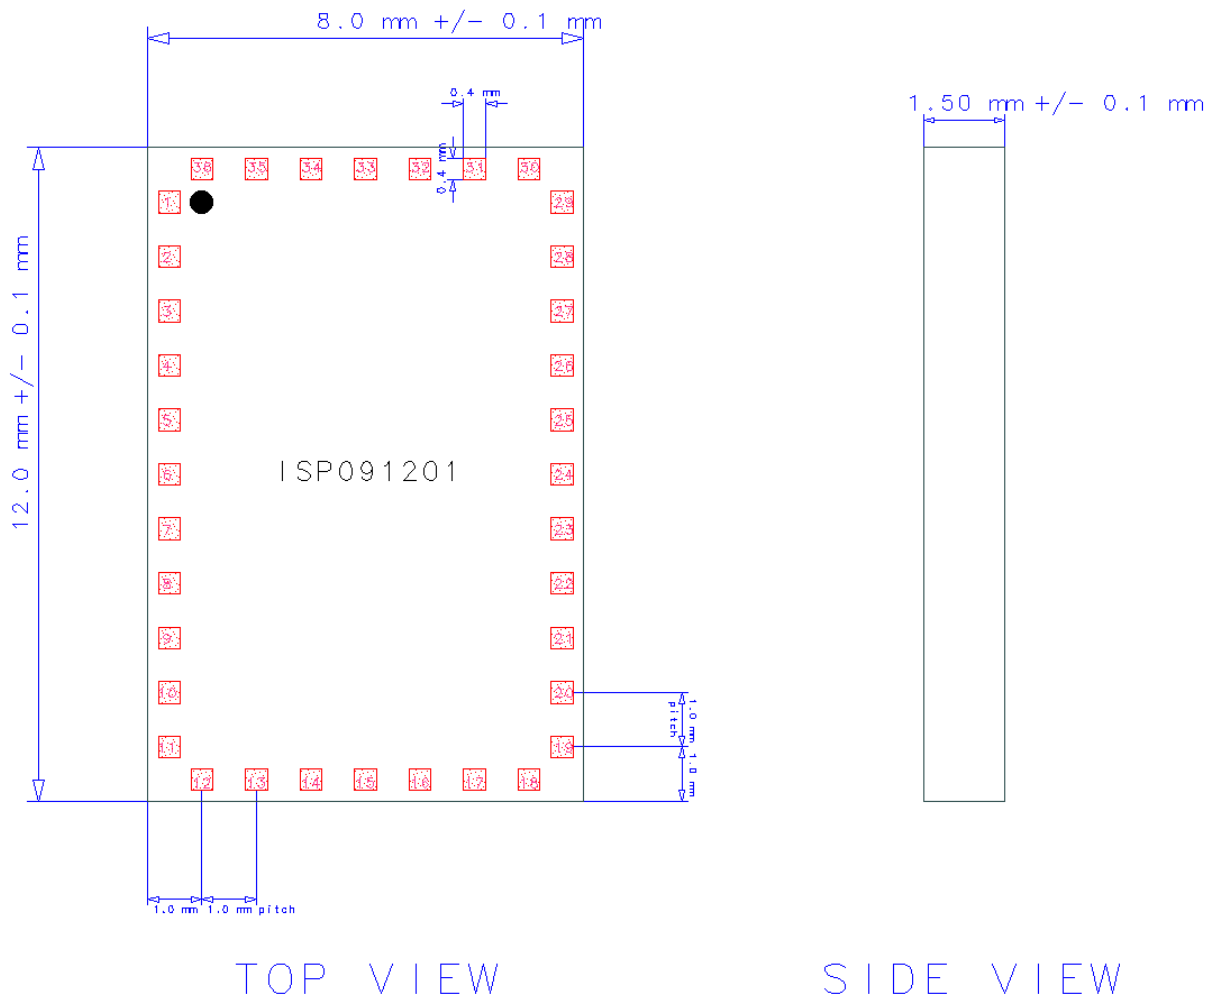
Dimensional drawing for 8 x 12 x 1.5 mm, 36-Pad LGA Package
